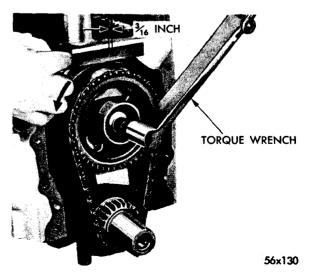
Measuring Timing Chain Stretch (Typical)
